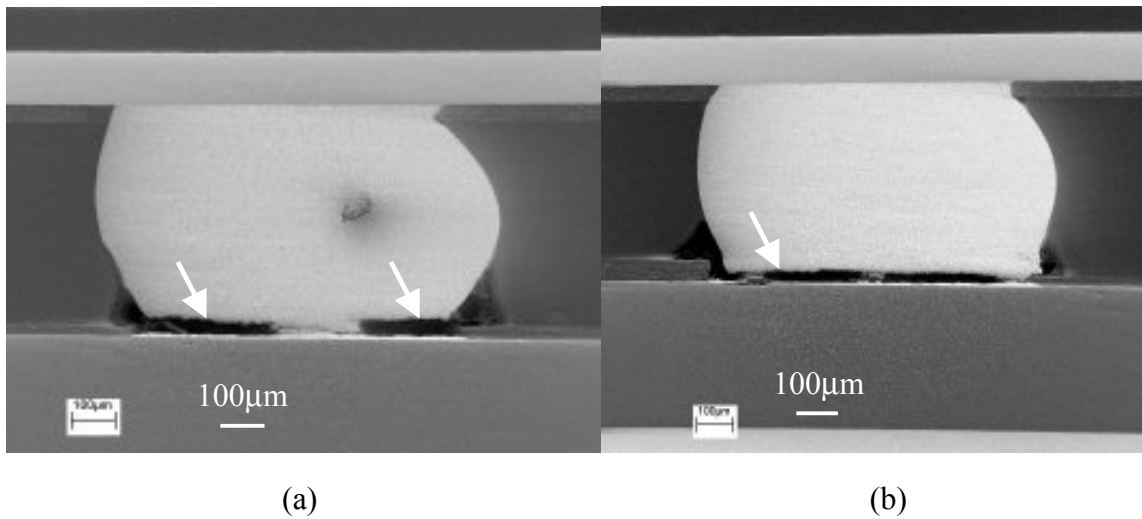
Cross-sections of (a) a center CCB solder joint and (b) an edge CCB solder joint after 8,500 cycles.
